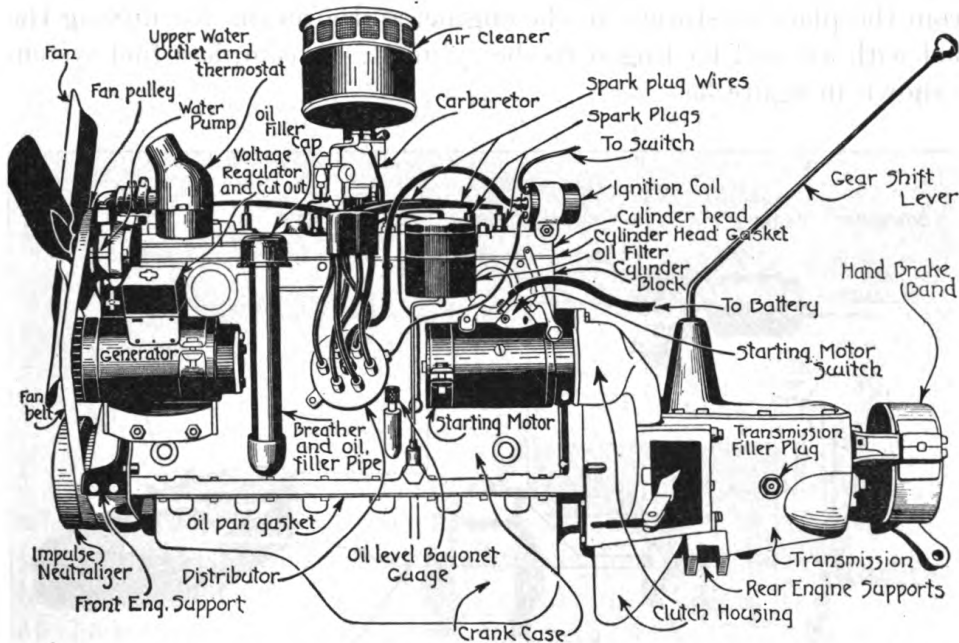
Typical engine and transmission assembly showing external parts, equipment, and accessories.
